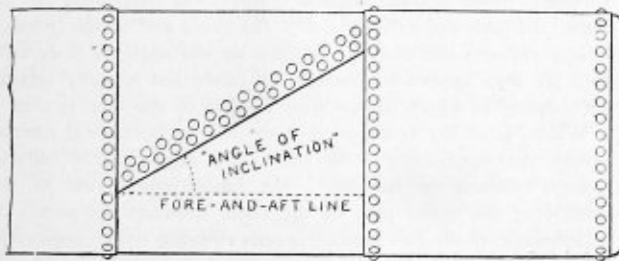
ILLUSTRATING THE DIAGONAL RIVETED JOINT.
